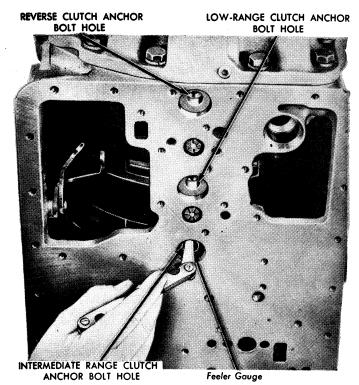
Checking reverse, low and intermediate clutch plate clearances
